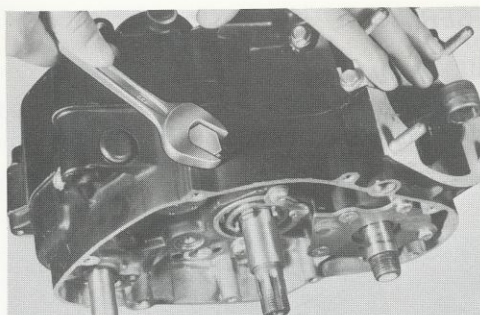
Remove gearshifting housing and take out shifting cam No. 2 stopper and spring.
